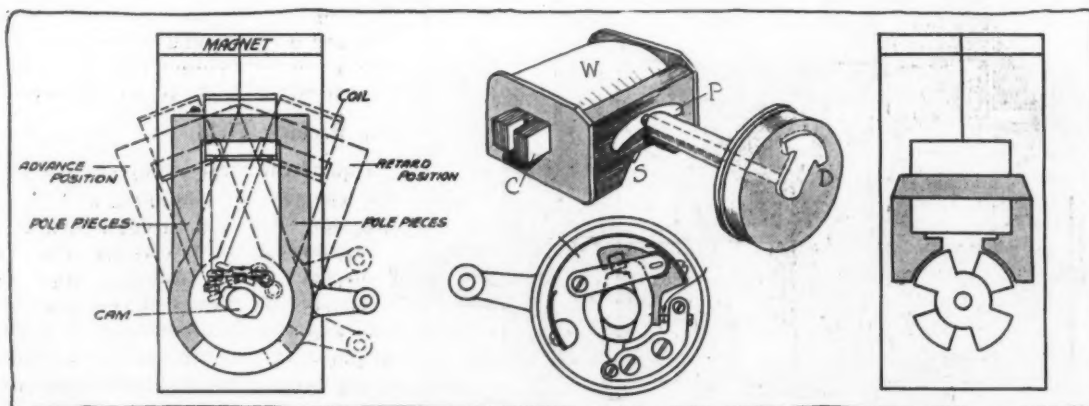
Left, showing how the laminated field with its windings rocks inside the magnets simultaneously with the circuit breaker. Center, the windings and distributor block of the four-cylinder model, and below, the distributor with stationary contact points. Right, the laminated field on the eight and twelve-cylinder magnetos in relation to the rotating pole extensions
